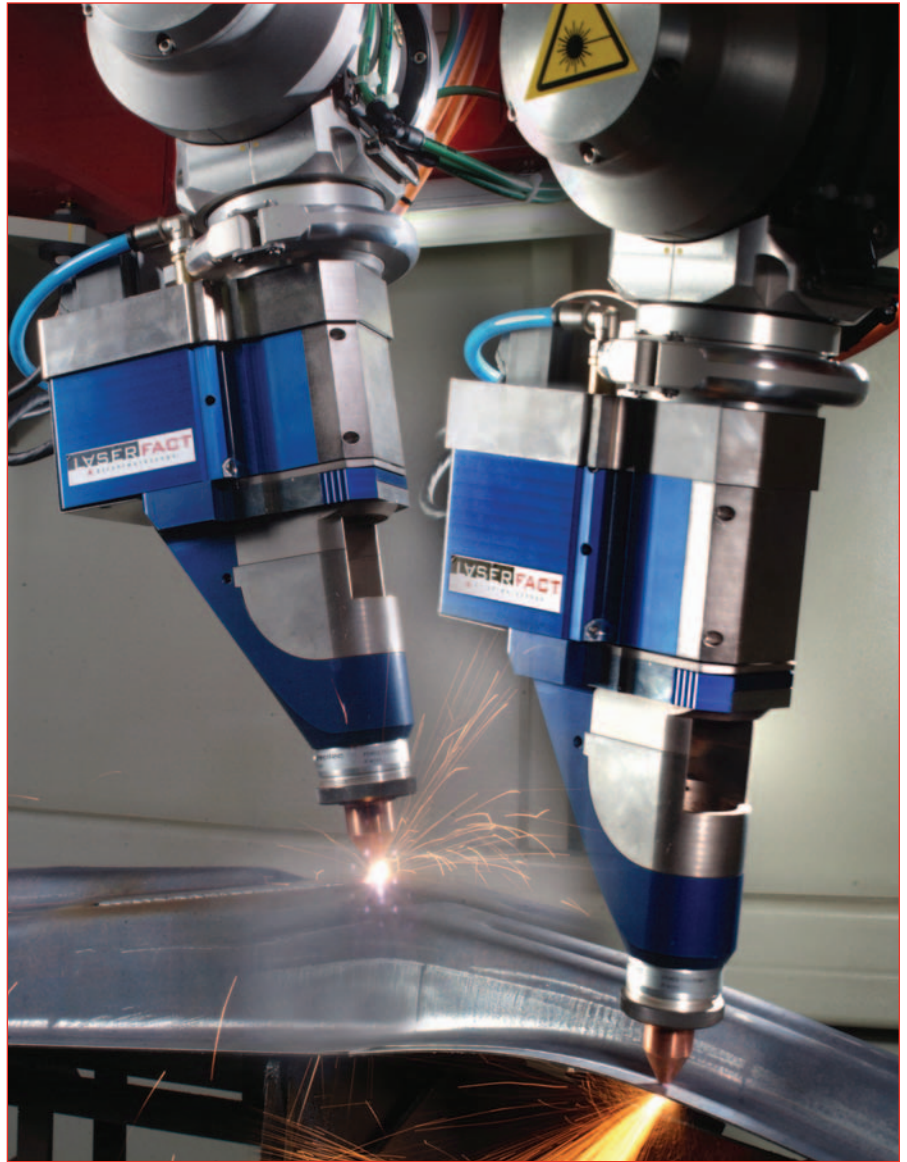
Combi-head at work. Cutting and welding process on the B-pillar with a gantry-robot. (Photo courtesy of Laserfact GmbH.)
